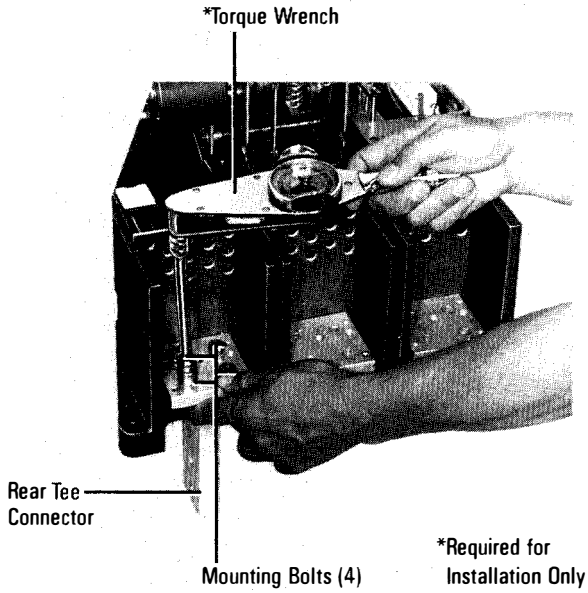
Installation/Removal of Rear Tee Connector on Fixed Mounted 1600 Amp Breaker.
